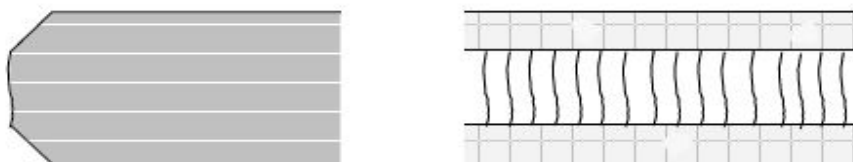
ARRISED EDGE (WITH BLANK SPOTS)
